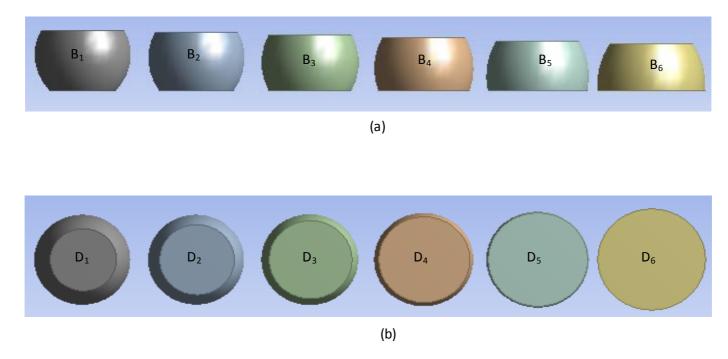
Six sizes of solder bump showing: (a) front view of solder bumps; (b) PCB bottom plan of bumps
